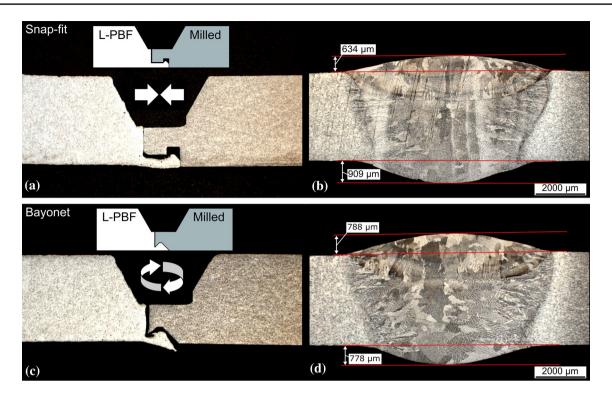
Metallographic cuts of the snap-fit joint in a assembled, b welded condition, and of the bayonet joint in c assembled, d welded condition; including root penetration and cover excess measurements
